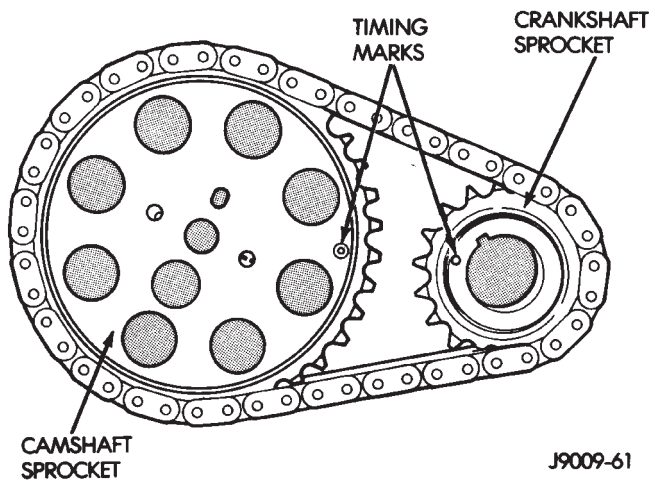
Crankshaft—Camshaft Alignment—Typical
